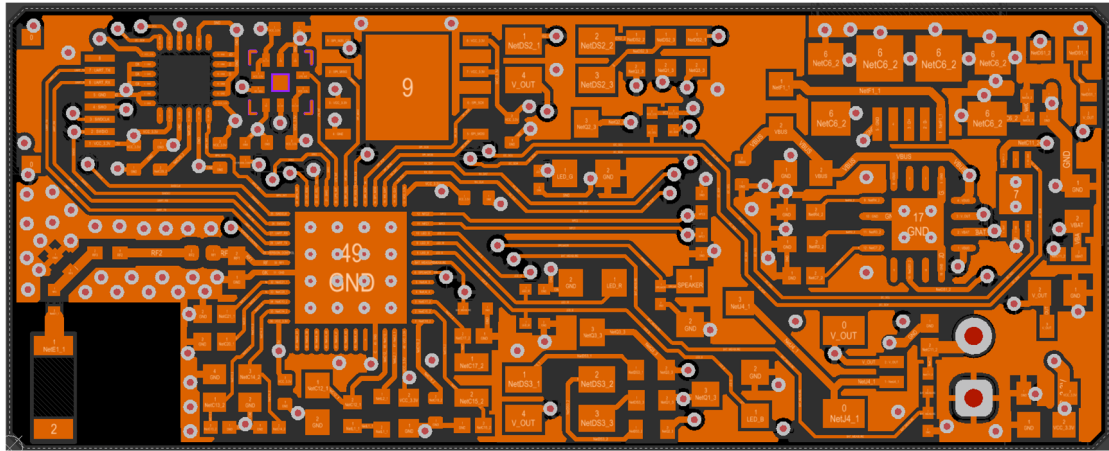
Top-layer layout of WBR-SH2 motherboard.
